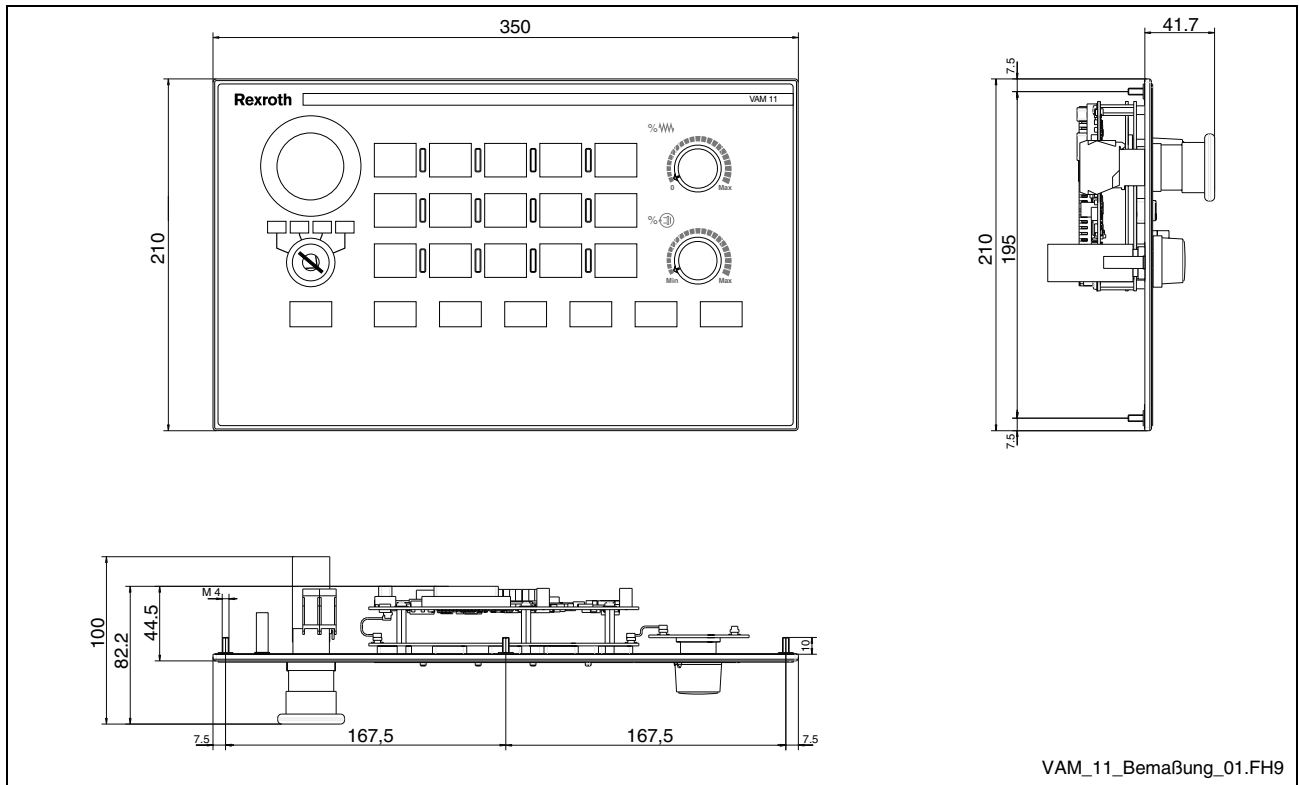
Housing dimensions VAM 11.1, front, side and top view
